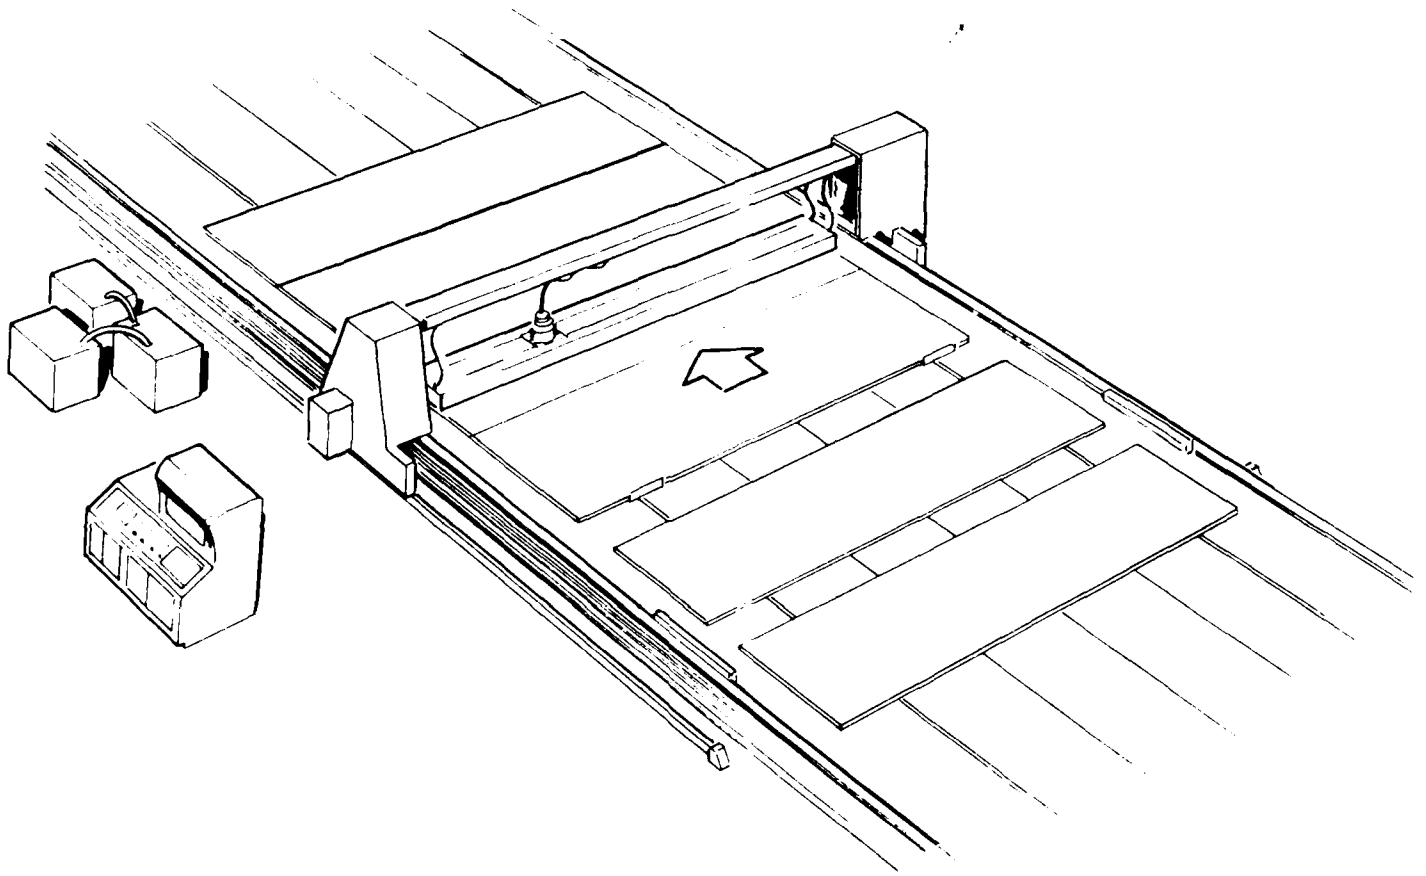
MOBILE OR SLIDING SEAL EB WELDING
